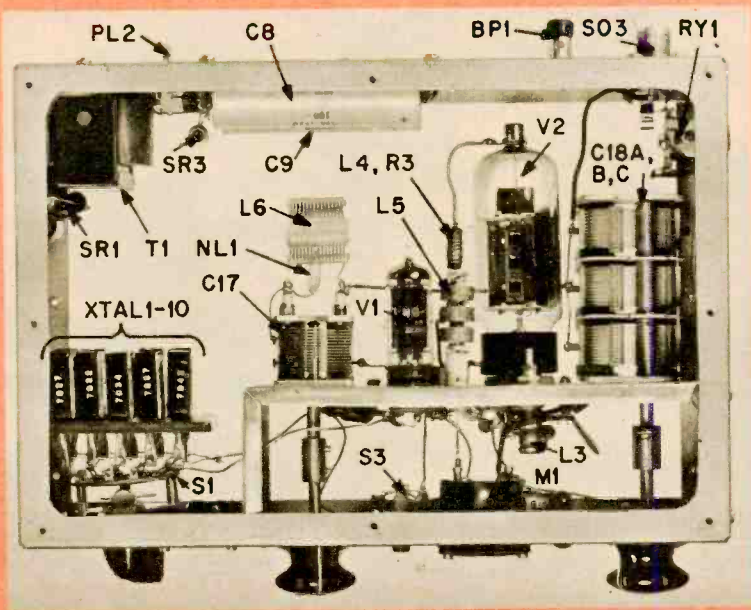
View into top of transmitter showing location of major components. Leads from underside of subchassis to back panel and to S1 pass through grommets holes. Note especially position of L5, L4/R3 combination, NL1 and L6. Lead from L4/R3 should be long enough to permit installation of clip on V2's cap.
